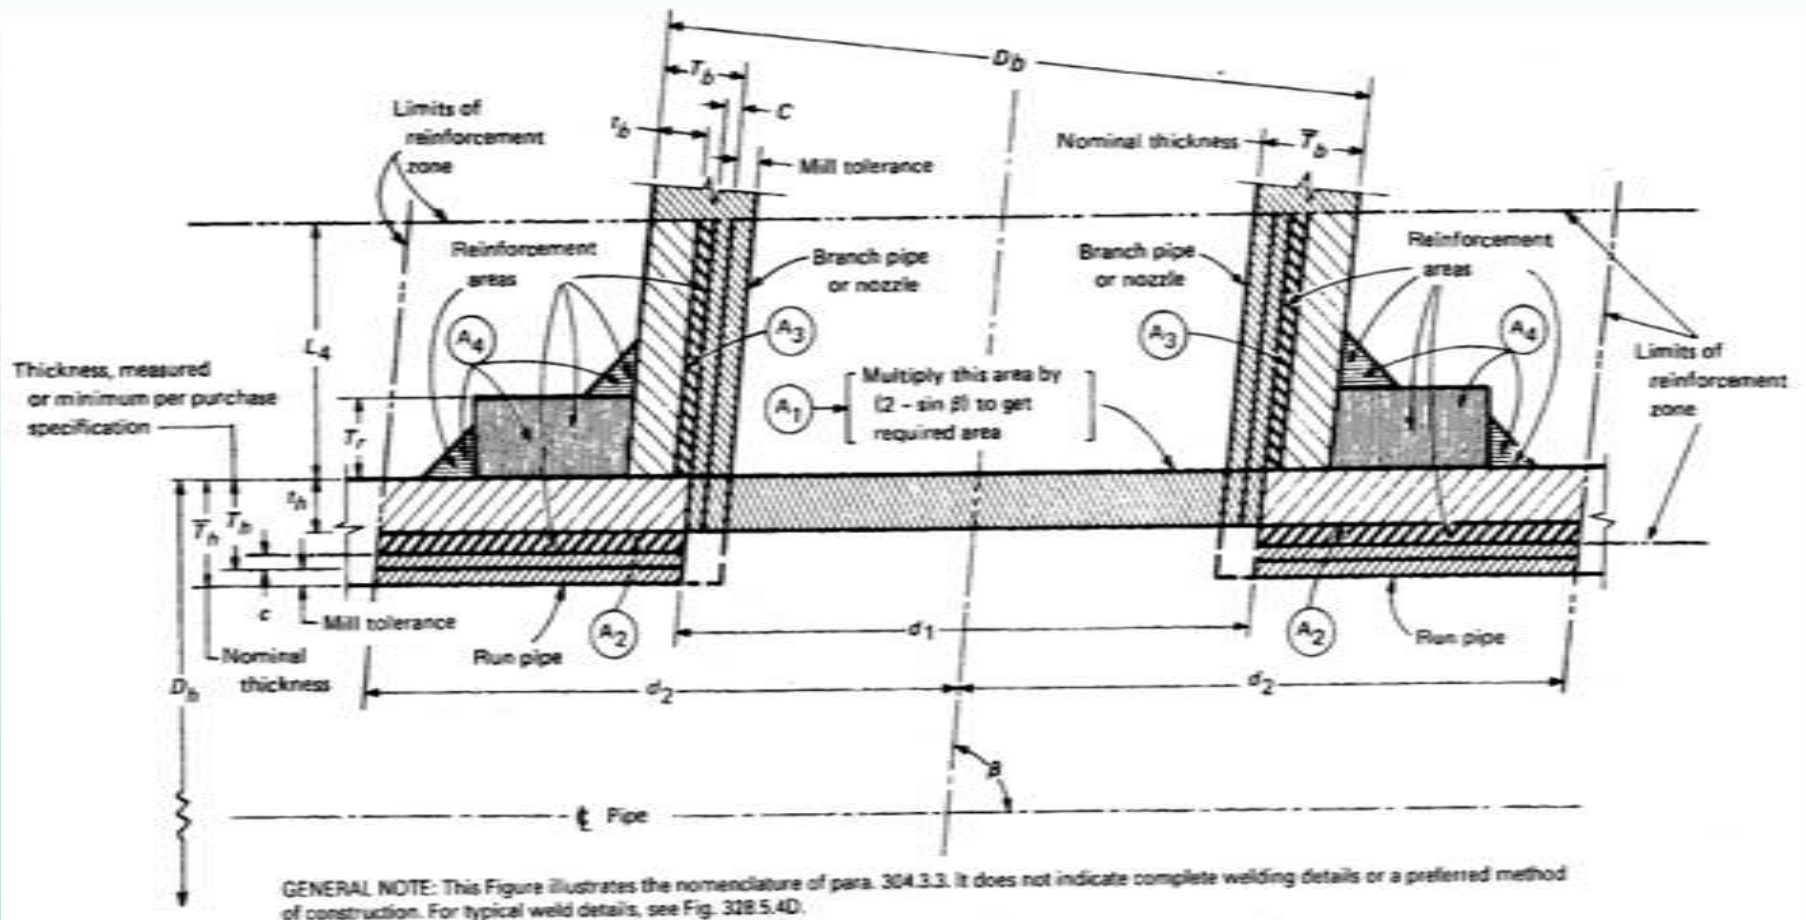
BRANCH CONNECTION NOMENCLATURE
